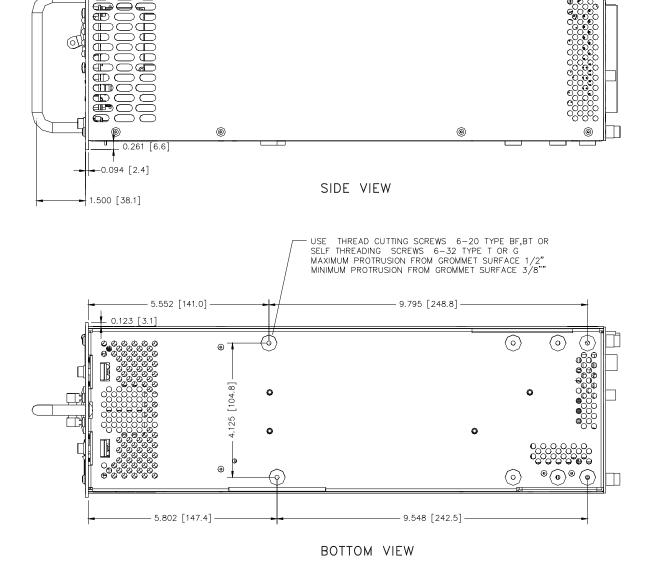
HSP-A OUTLINE DRAWING. (SHEET 1 OF 2)
